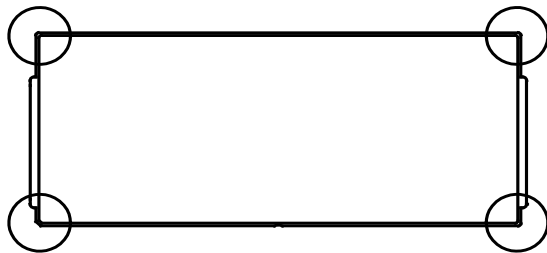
Top view of a tray showing the measurement locations for the outline dimensions
